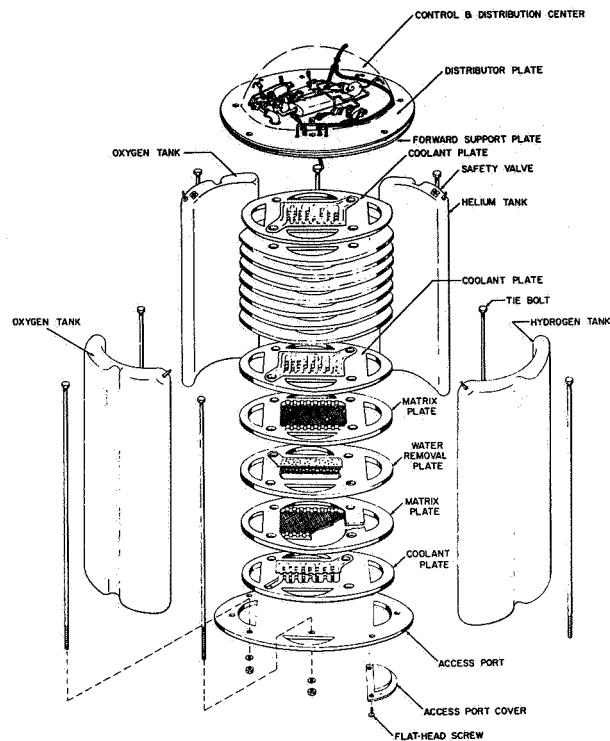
EXPLODED VIEW OF ADVANCED SYSTEM CONCEPT
